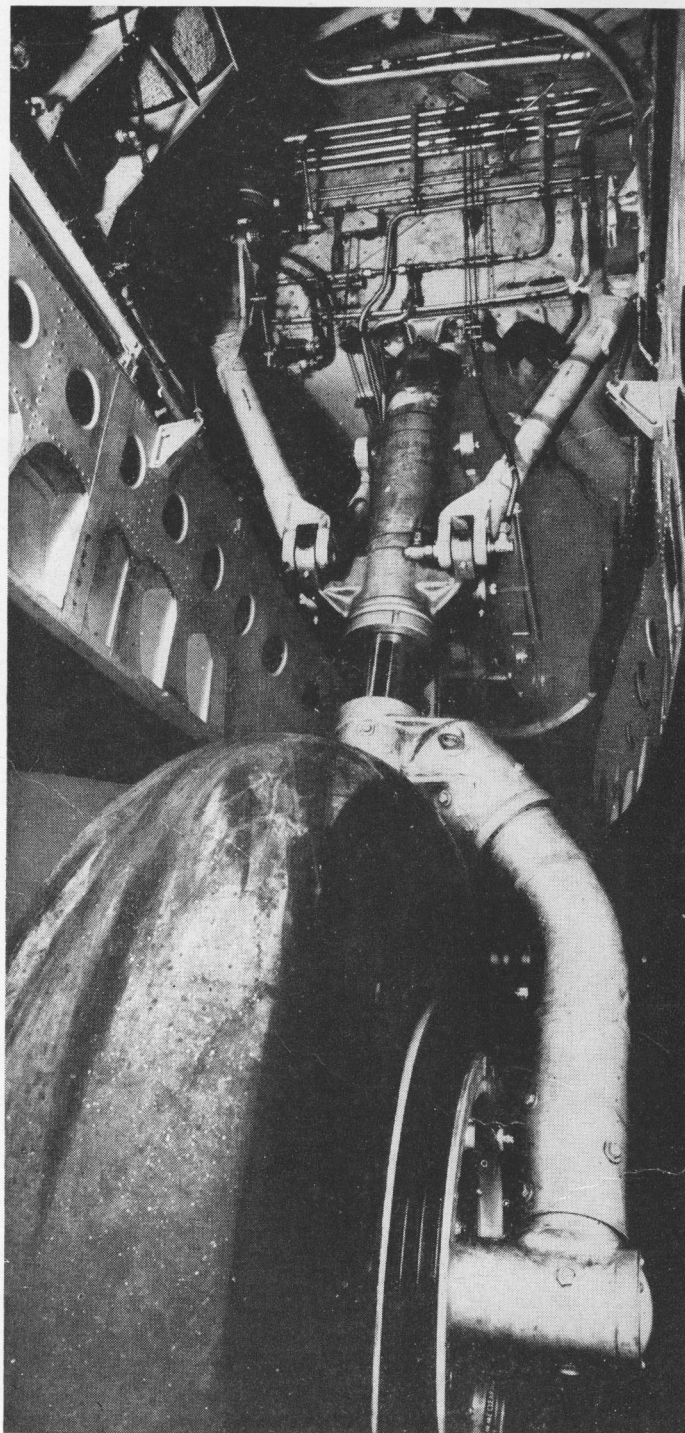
A head-on view of the nacelle shows the hydraulic retracting cylinder and bell crank at the upper left, forming part of the outboard side brace strut. Ahead of the side brace struts are smaller hydraulic units, with a sequence valve, for closing the fairing doors to enclose the retracted wheel.
